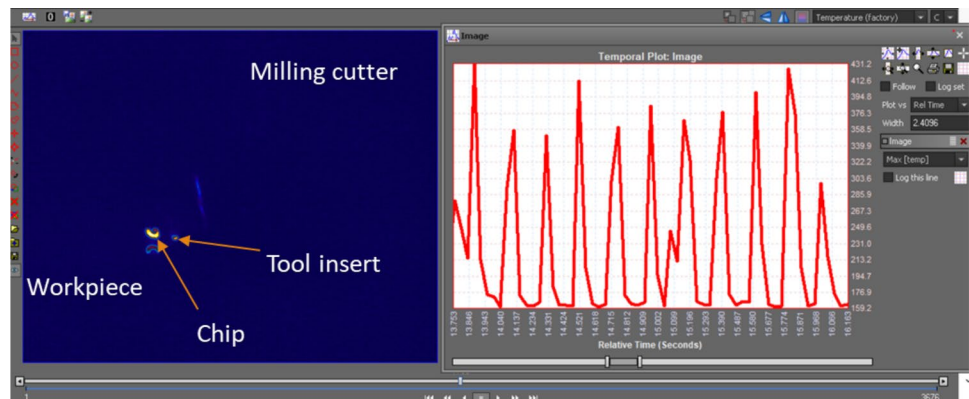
Representative chip temperature profile while machining under roughing conditions using CrAlNAg9-coated tool (during 1st run)
